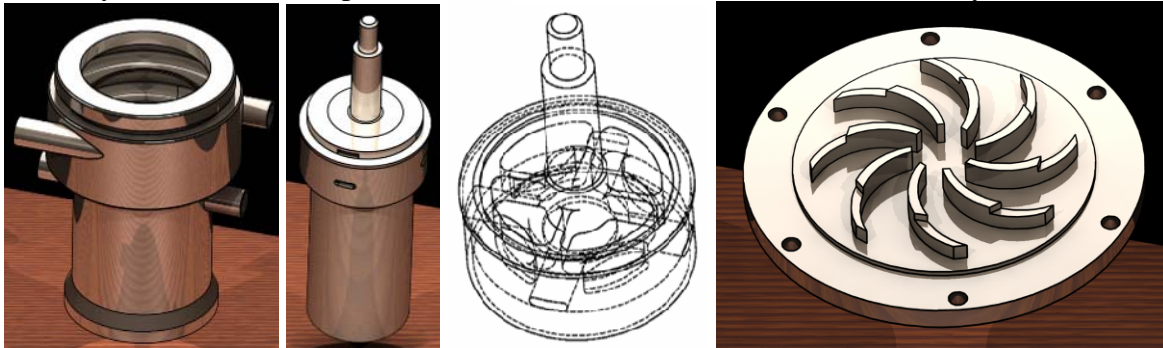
Main components of the centrifugal contactor CAD model. From left to right: case, rotor assembly, rotor head, and vanes.
